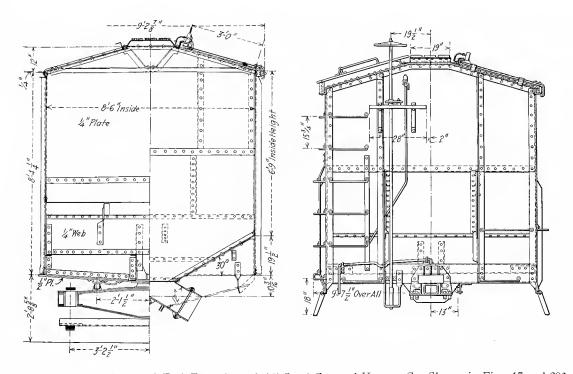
Cross Sections and End Elevation of All-Steel Covered Hopper Car Shown in Figs. 17 and 293.
